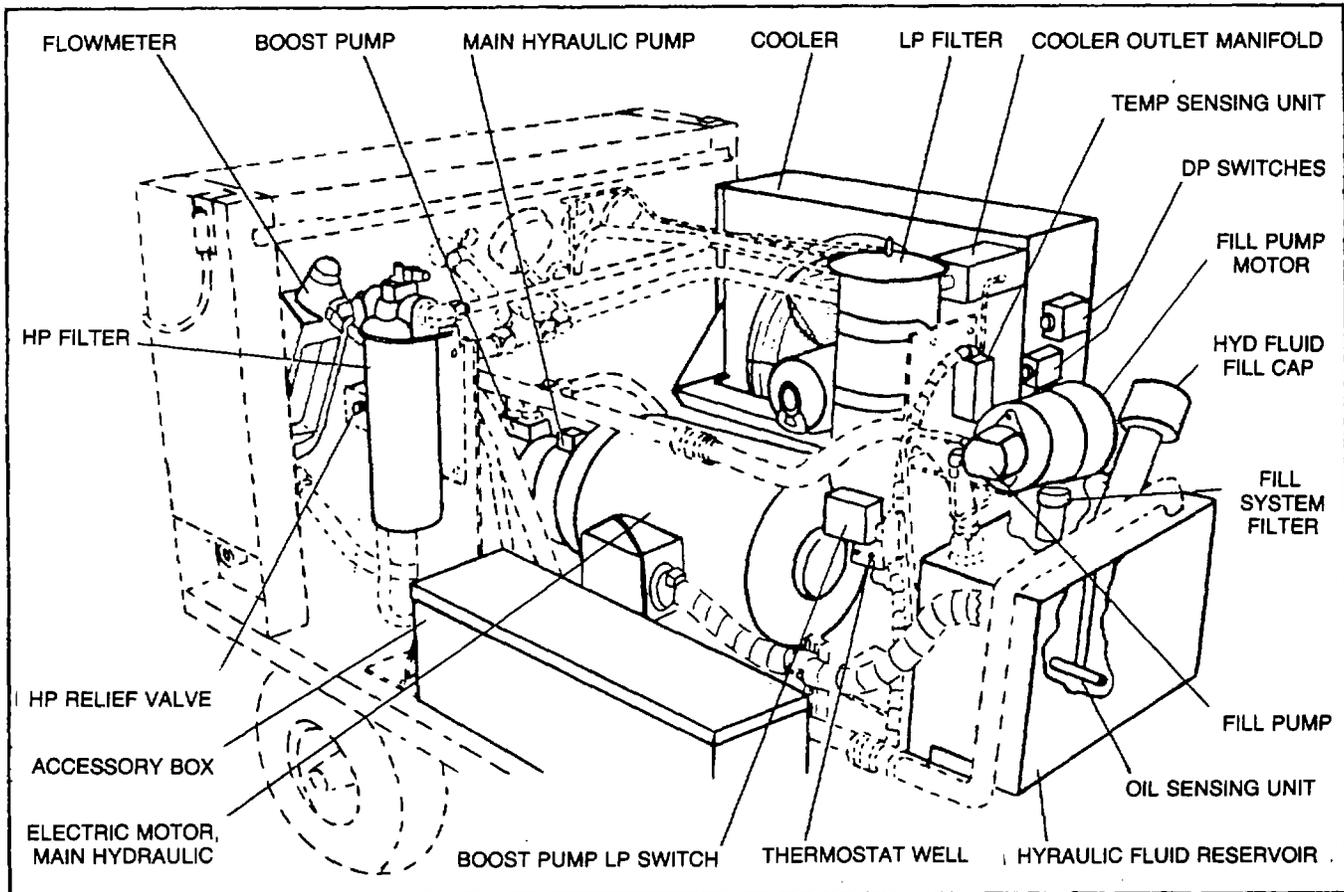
INTERNAL COMPONENTS ASSEMBLY
